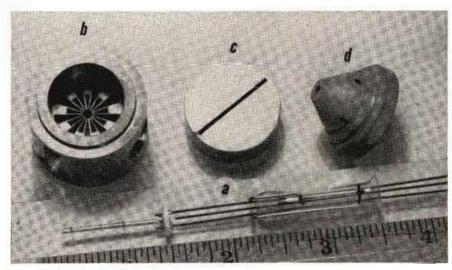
Parts comprising the type PAX3 magnetron. Shown in photo are (a) cathode assembly, (b) cavity, (c) quarterwave transformer, and (d) conical pole pieces
